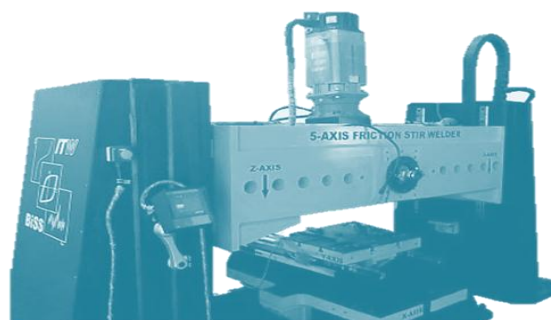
BiSS 5 Axis friction stir welder.
